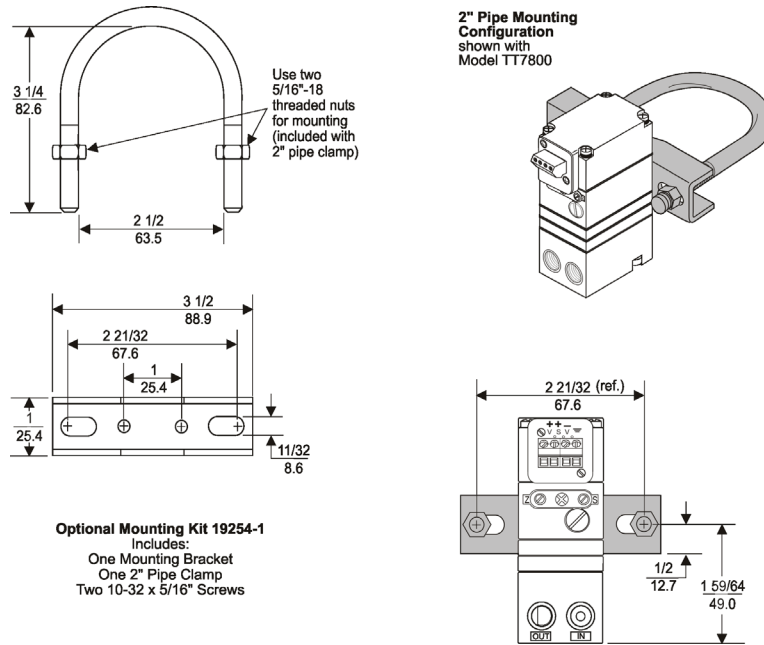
Optional Mounting Kit 19254-1 (sold separately)
